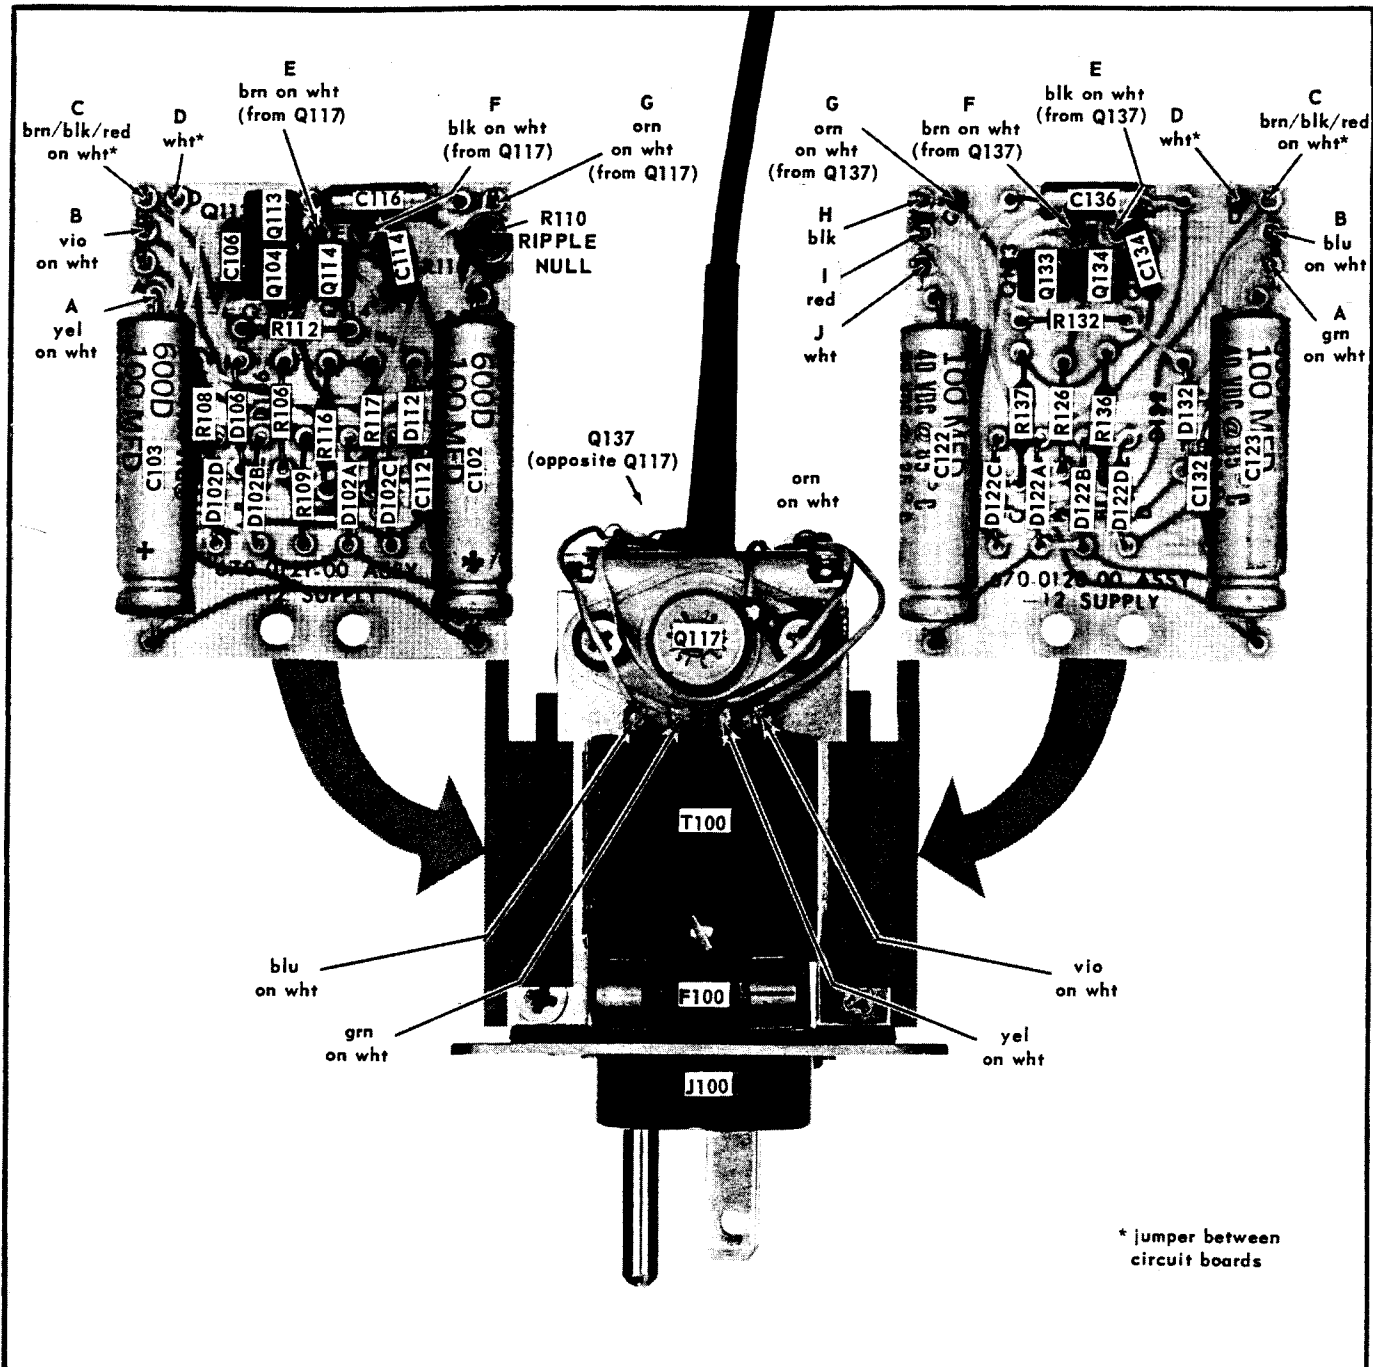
Component locations and wiring color code on circuit boards and chassis, and board locations as viewed from bottom (fuse side) of chassis.
